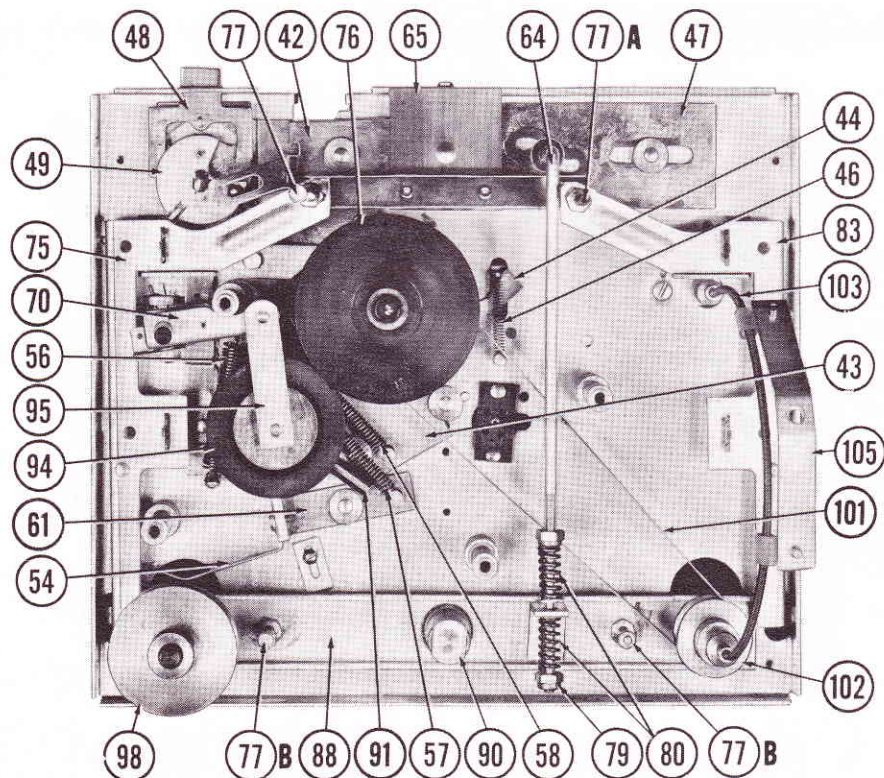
Bottom View Of NL-2 & NL-3 With Motor Mtg. Plate Removed.
